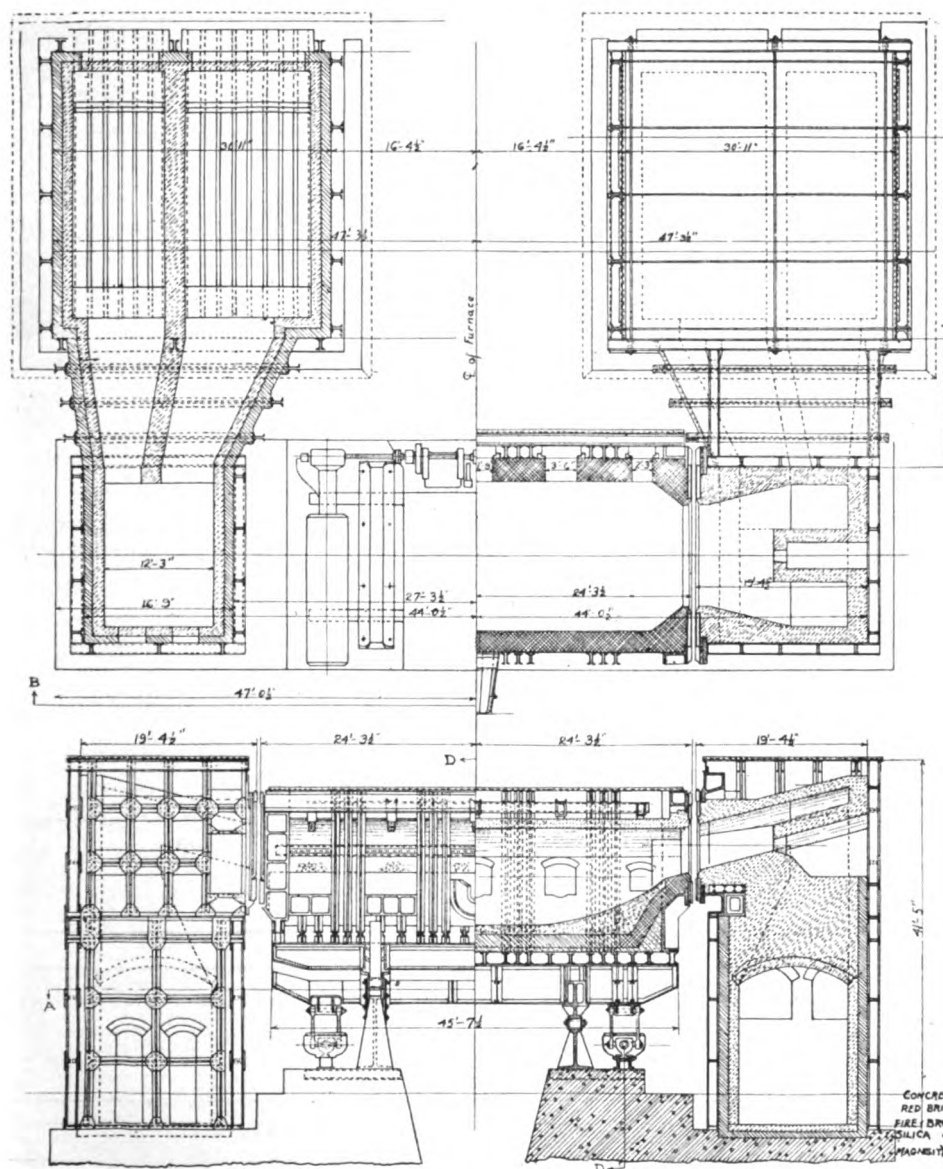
200-ton tilting open hearth furnace, mounted on two sets of rollers and stands—The arrangement provides true roller bearing entailing a minimum amount of required power and facile manipulation.
